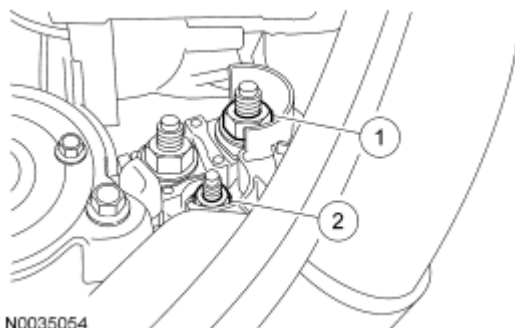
Identifying Battery Cable & Starter Solenoid Terminal Nut
